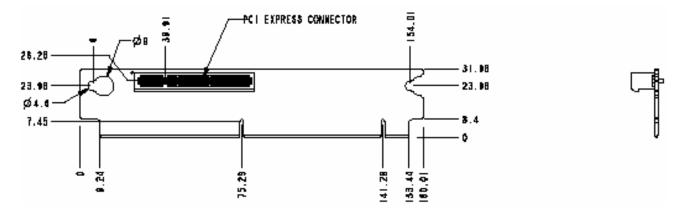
1U Full Height PCI-Express Riser Card Mechanical Drawing
